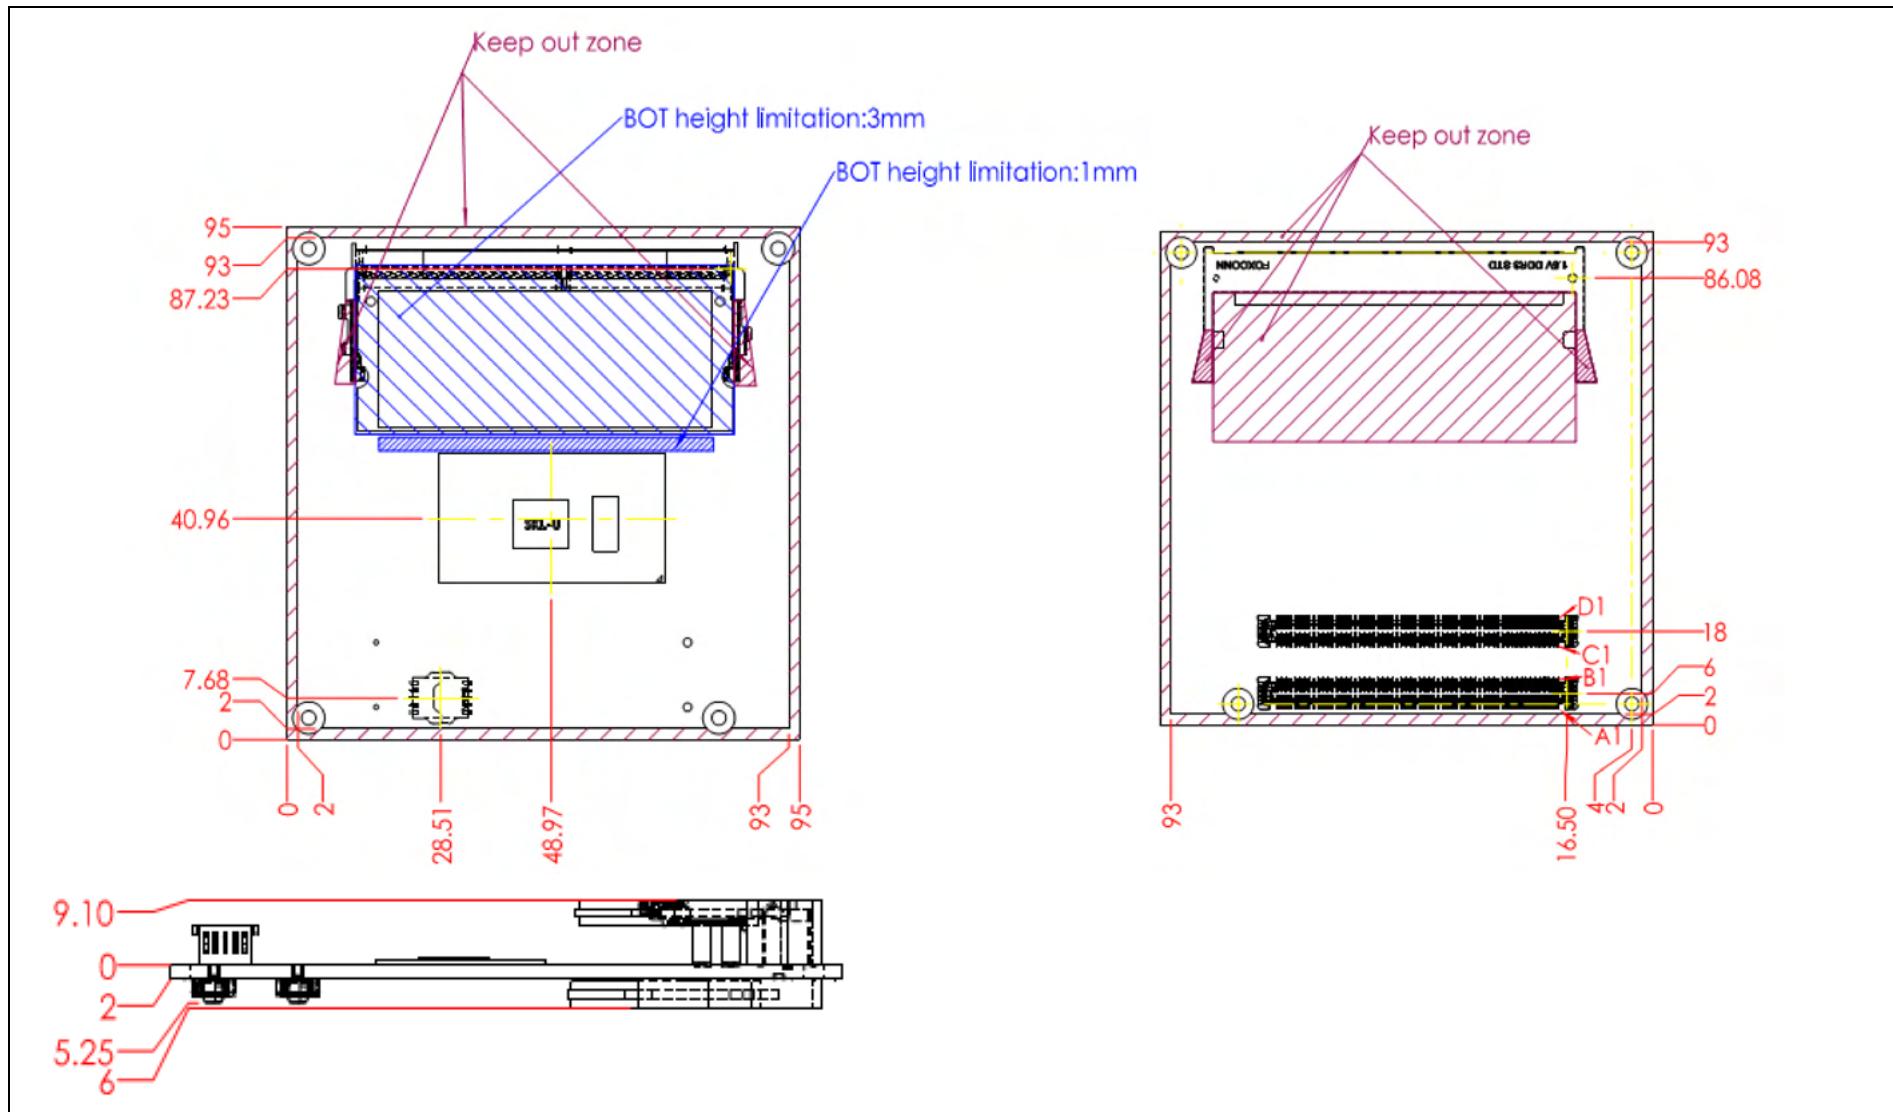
Mechanical Dimensions - Top & BOT & Assembly
